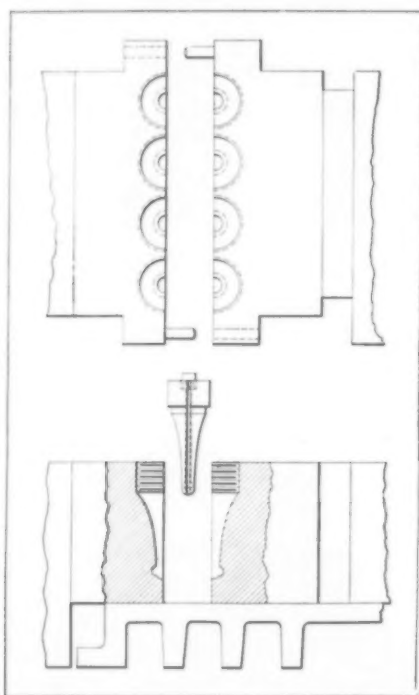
Mold for Angle Molding Telephone Receiver Shells
